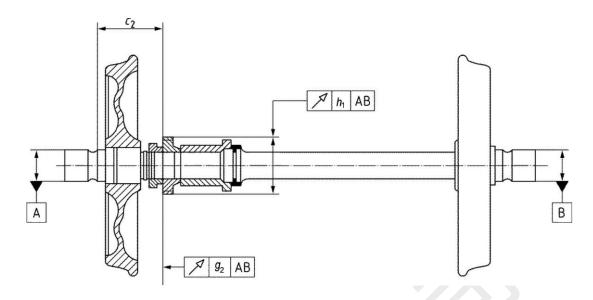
Cylindrical gear wheels for powered axle, reducing gears, etc.
